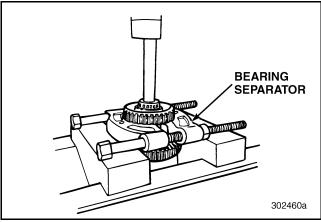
Pressing off Lo-Split Gear and Bearing Cone
